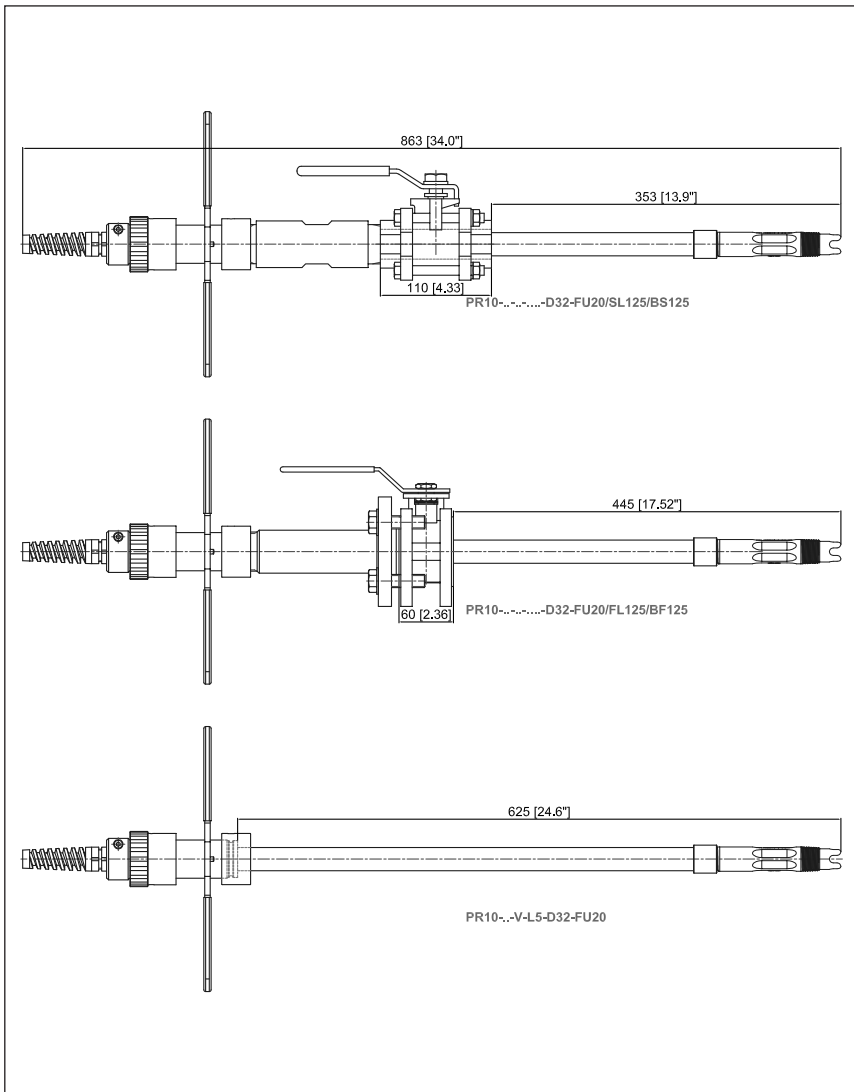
Dimensional drawing PR10...-D32 with mounted FU20 sensor
